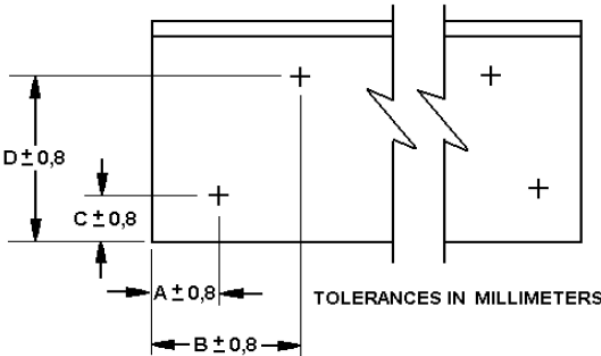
EDGE DISTANCE TOLERANCES
